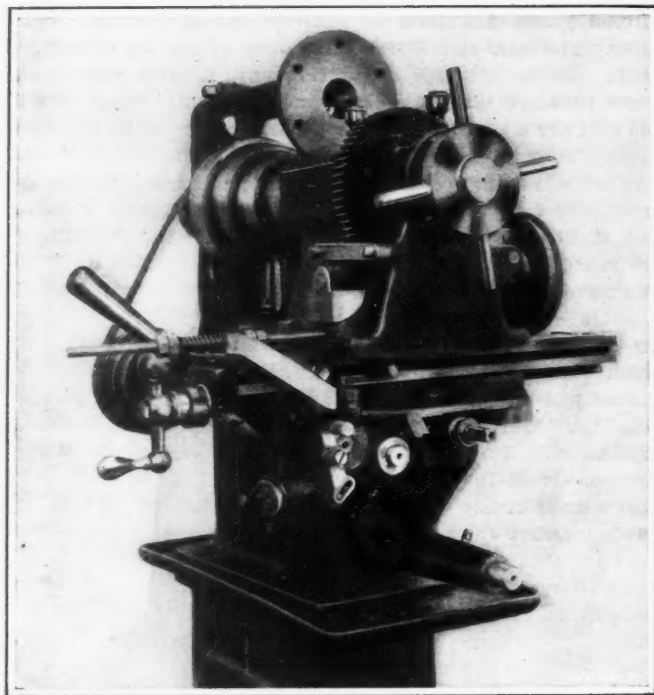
American Ammunition Co.'s Thread Miller for Internal and External Threads
